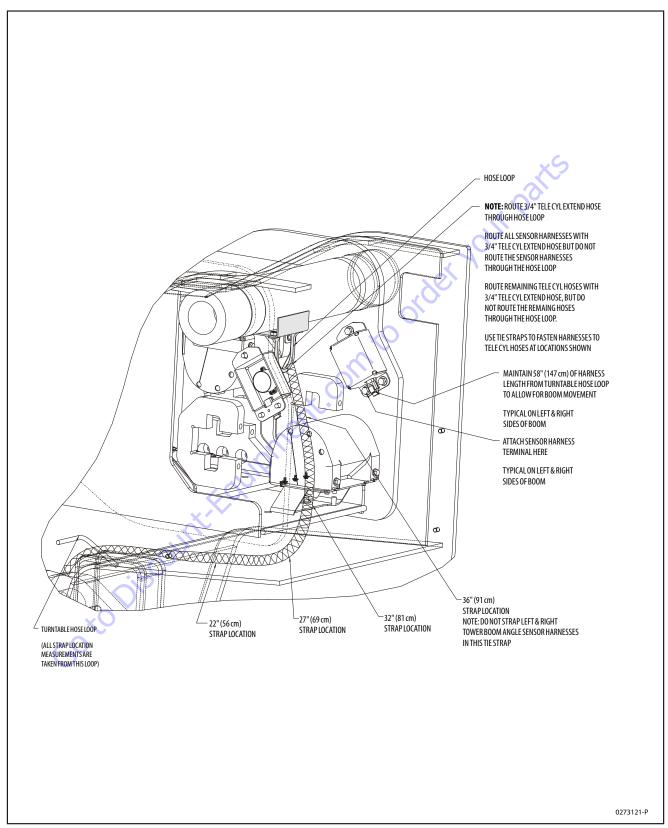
Boom Sensor Locations - Upper Length, Lower Length, & Tower Boom Angle - Sheet 2 of 2
